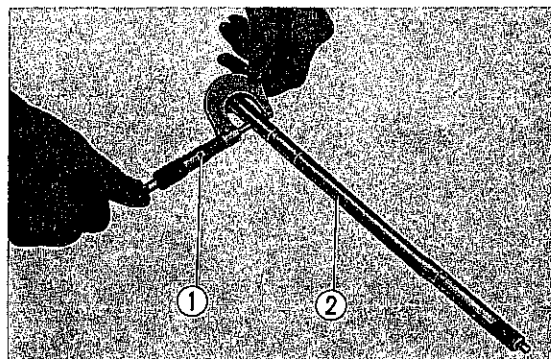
① Micrometer ② Rear fork pivot shaft
